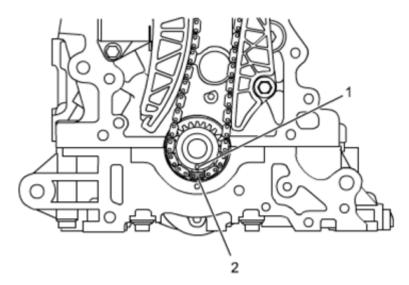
Aligning Blue Plate With Timing Mark On Crankshaft Timing Sprocket Courtesy of SUZUKI OF AMERICA CORP.
